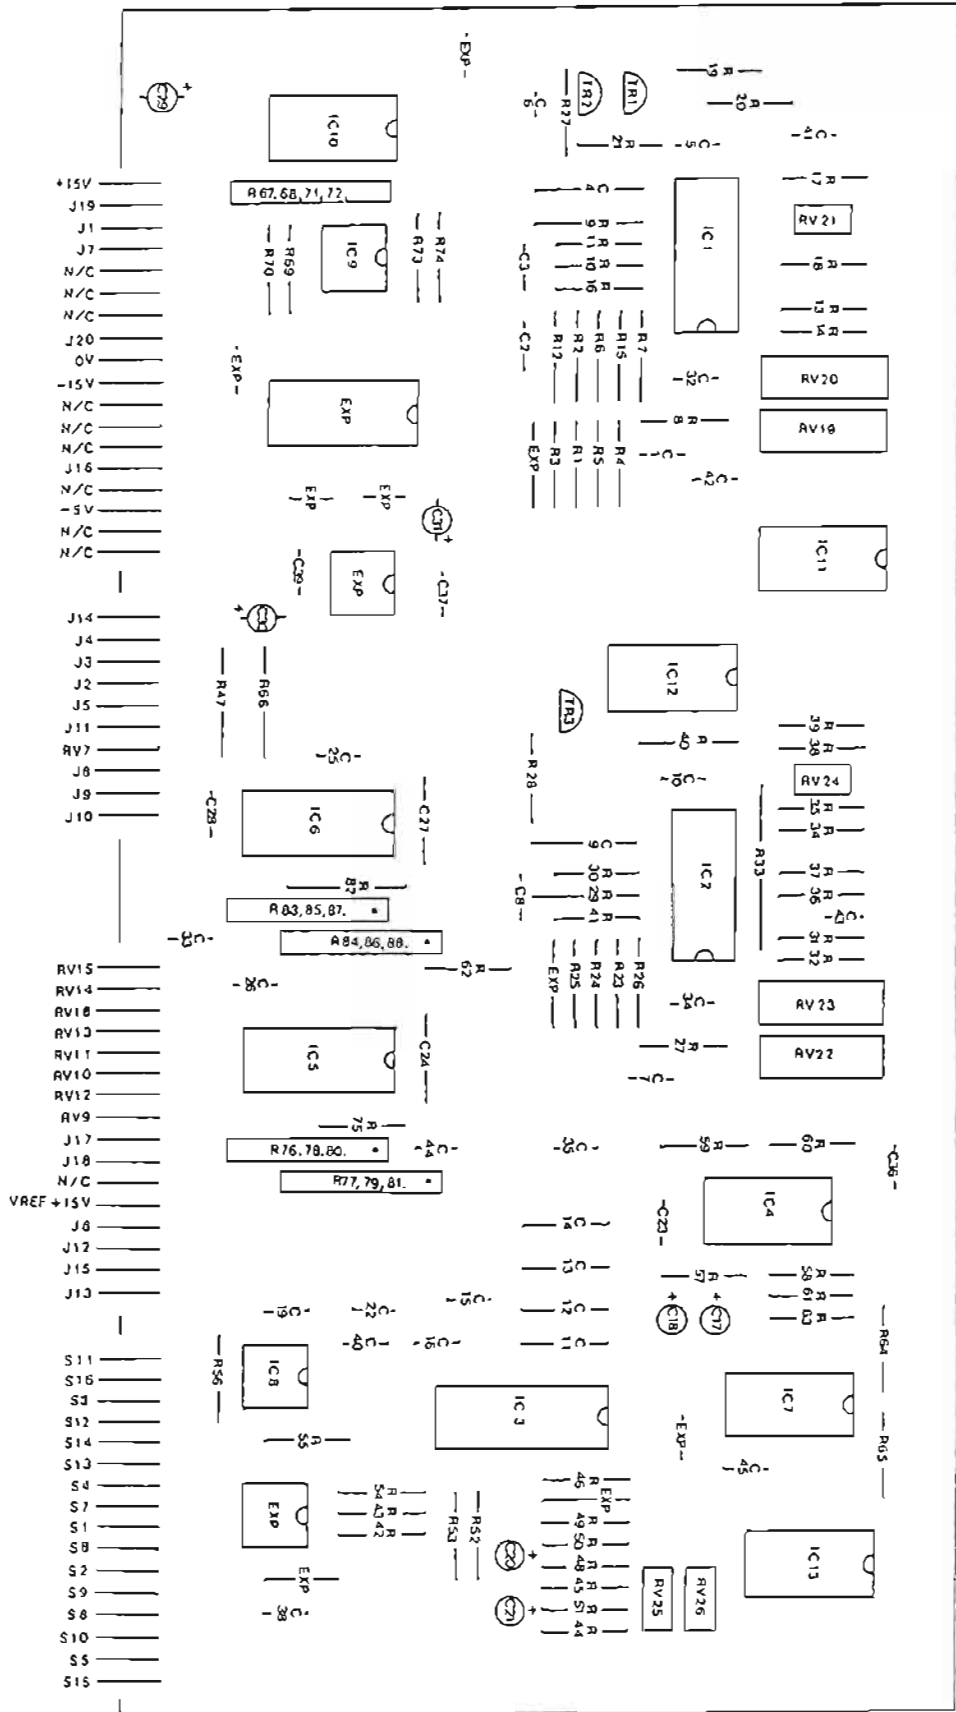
80-C9 PCB COMPONENT LAY-OUT
